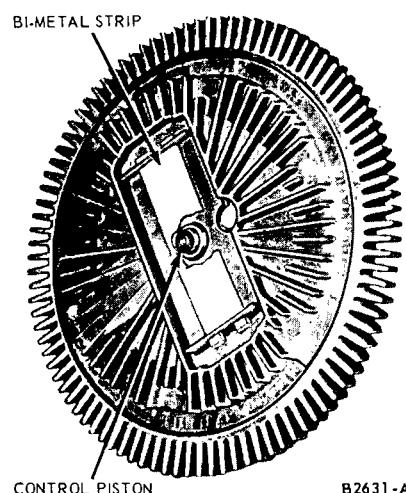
Fan Drive Clutch With Flat Bi-Metal Spring
